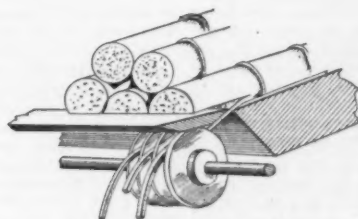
Bamboo-shredding machine patented by A. R. Williams
